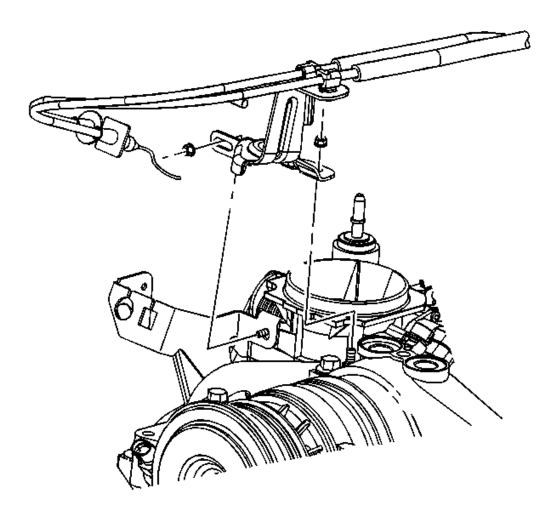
View Of Accelerator Control Cable Bracket Courtesy of GENERAL MOTORS CORP.
